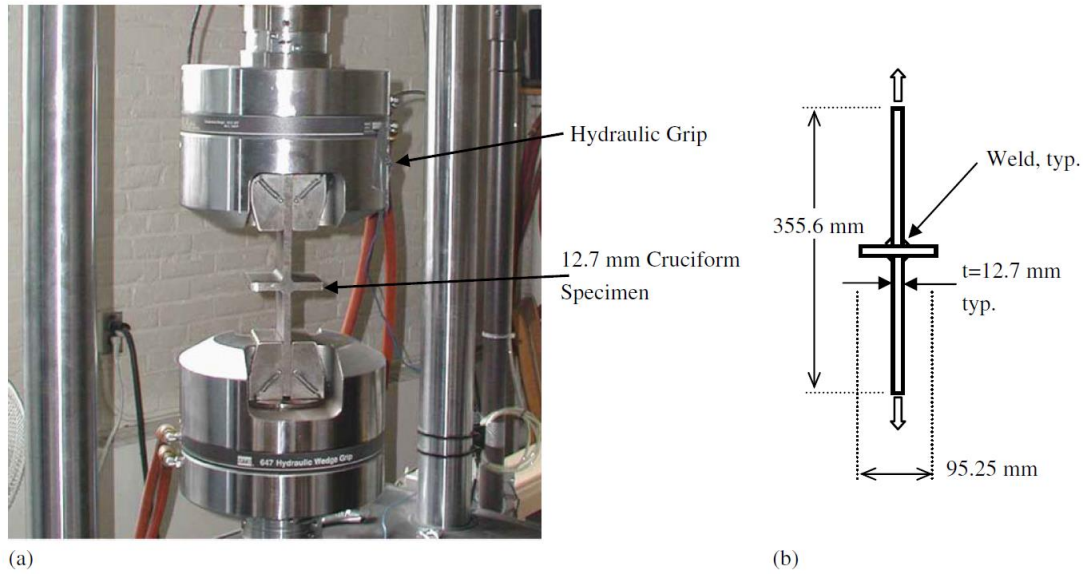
(a) fatigue test specimen in test machine. (b) dimensions of the test specimen (Caccese et al., 2006).
